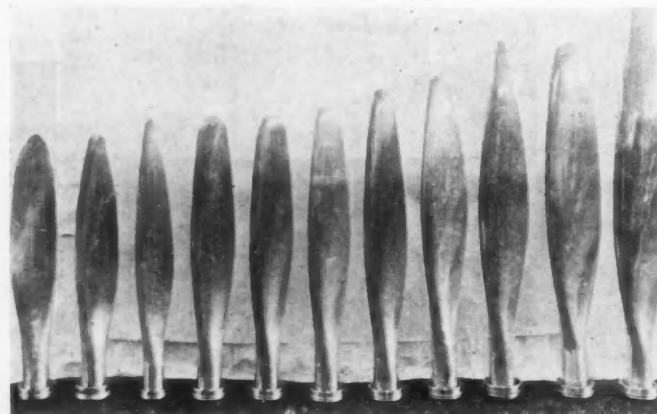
Controllable-Pitch Blades from 200-Hp. to 800-Hp. Types
